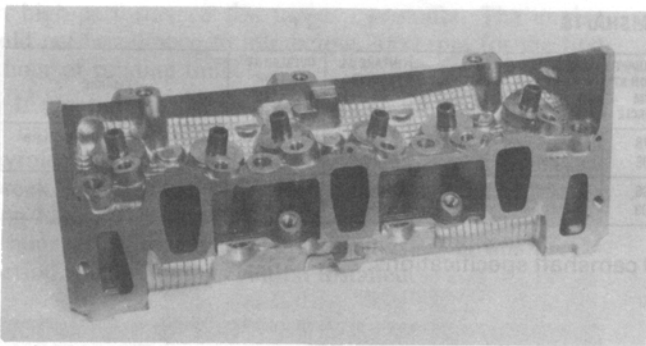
Production V6/60 "Generation II" aluminum cylinder head intake ports.
